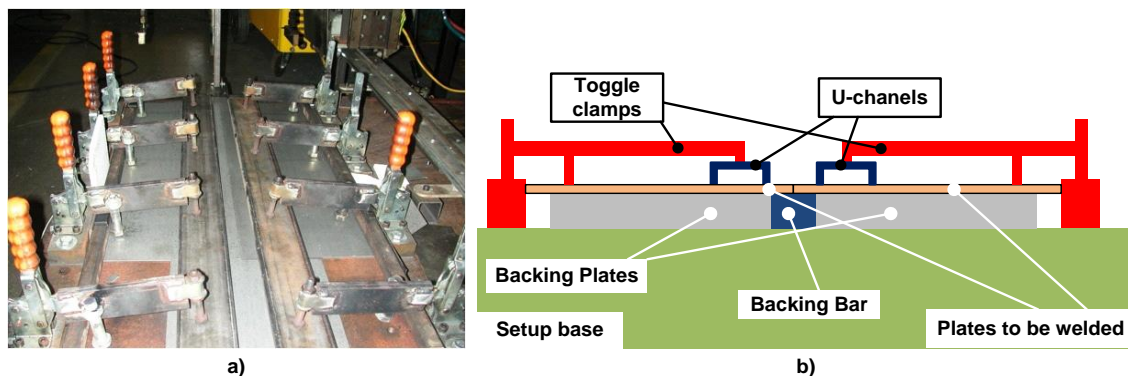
Clamping improved with U-channels on 2 mm TTH butt weld experimental setup
